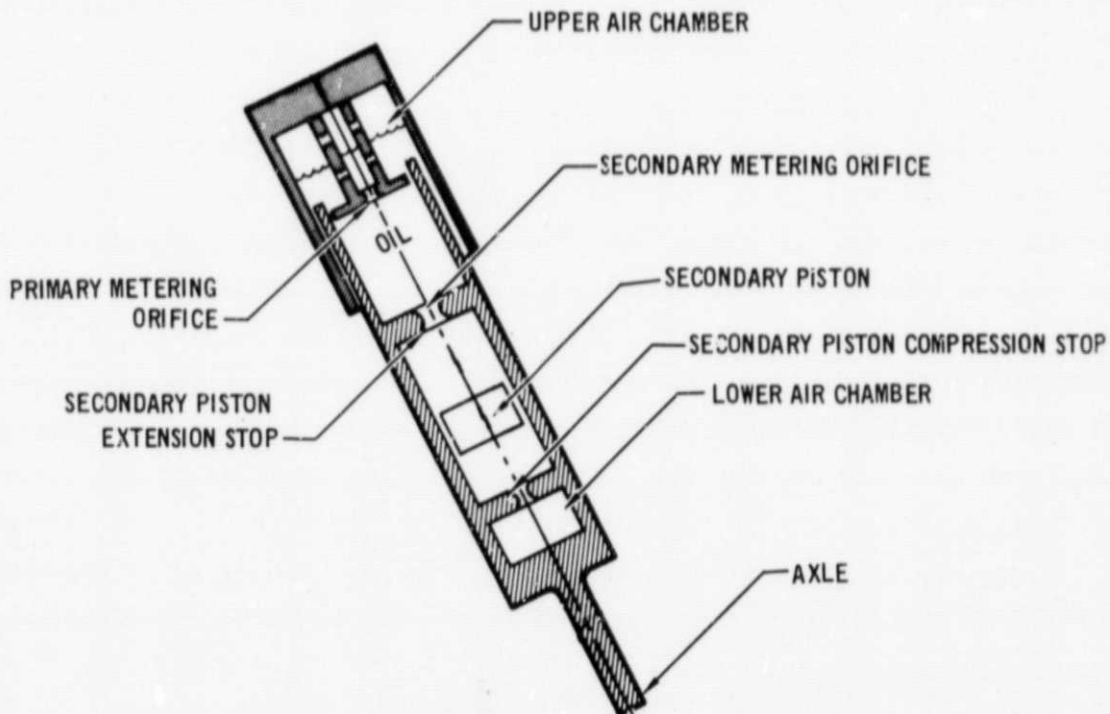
LANDING GEAR STRUT CONFIGURATION
